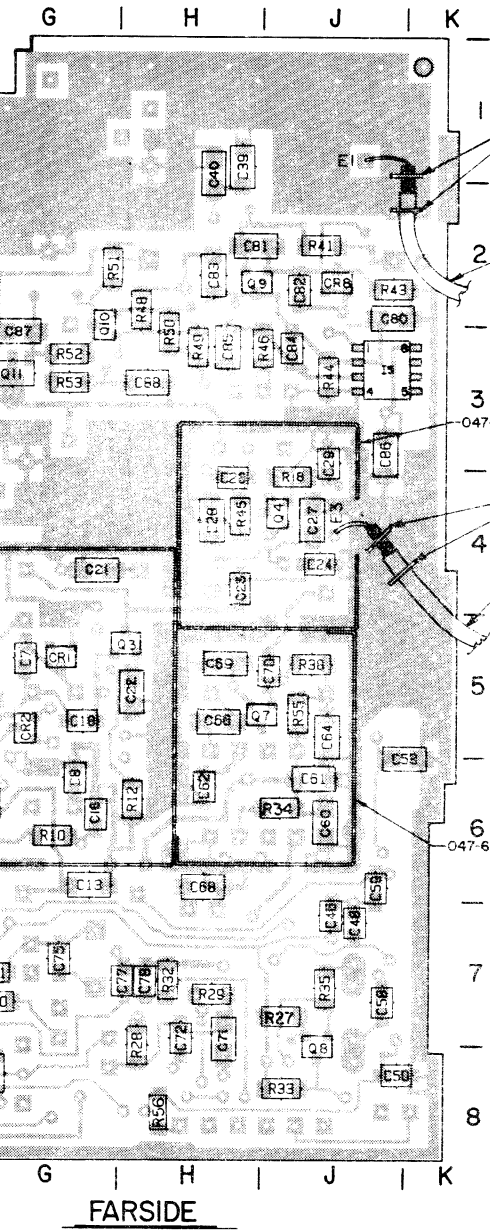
2 WATT TRANSMITTER ASSEMBLY
